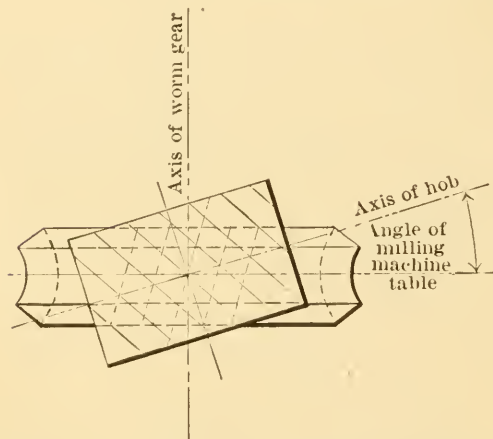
CUTTING WORM GEAR WITH A HOB OF A DIFFERENT ANGLE FROM THE ENGAGING WORM.
